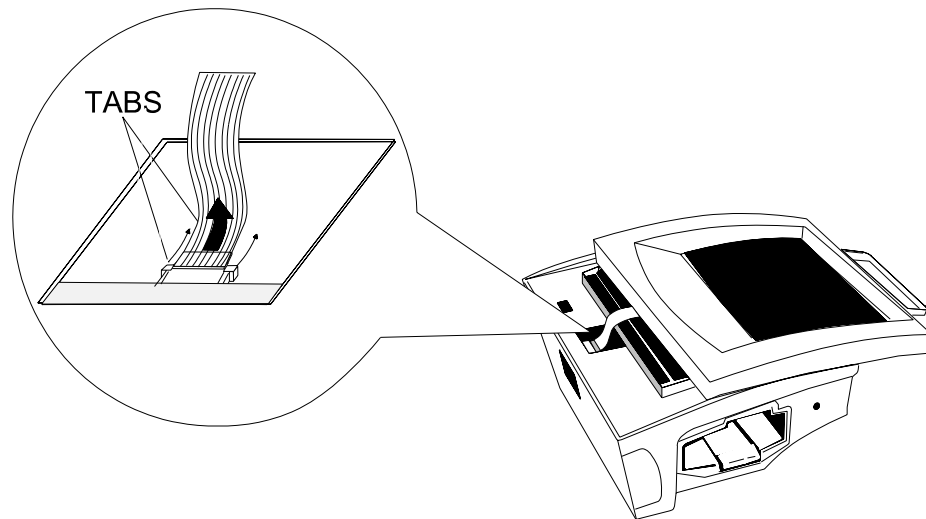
Disconnecting the Keyboard-to-Main Cable
